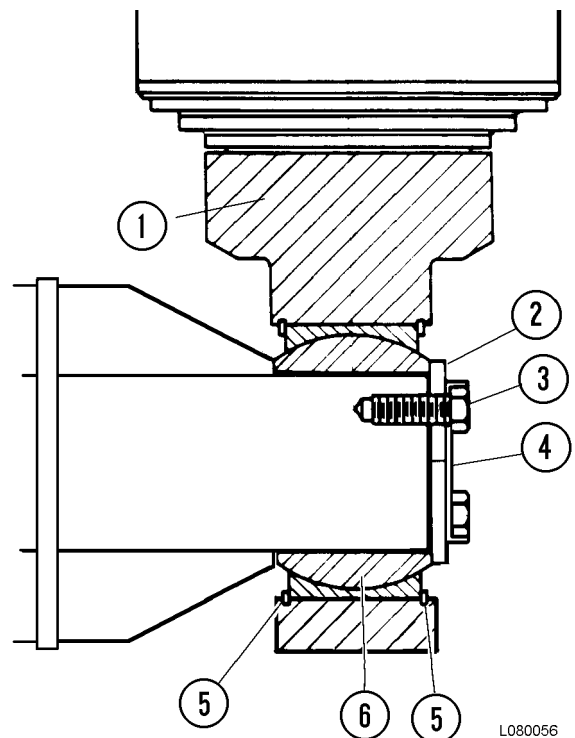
HOIST CYLINDER LOWER MOUNT
